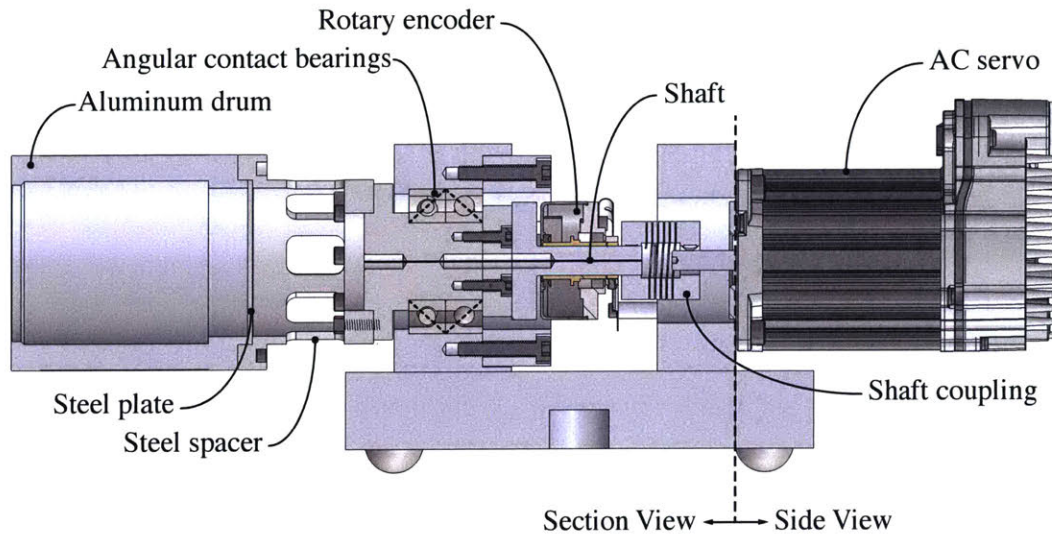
A labeled diagram of key centrifuge subassembly components.
